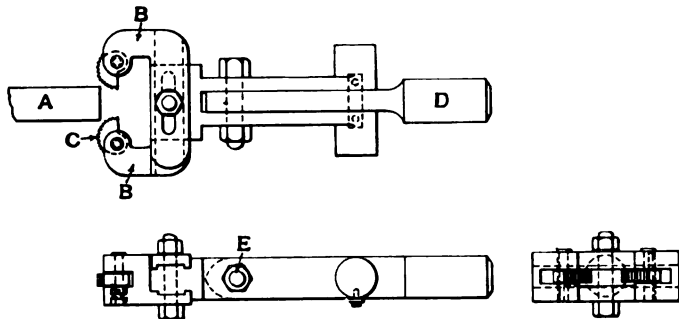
Adjustable Jaws for Pulling Work Through the Head of a Turret Lathe.
